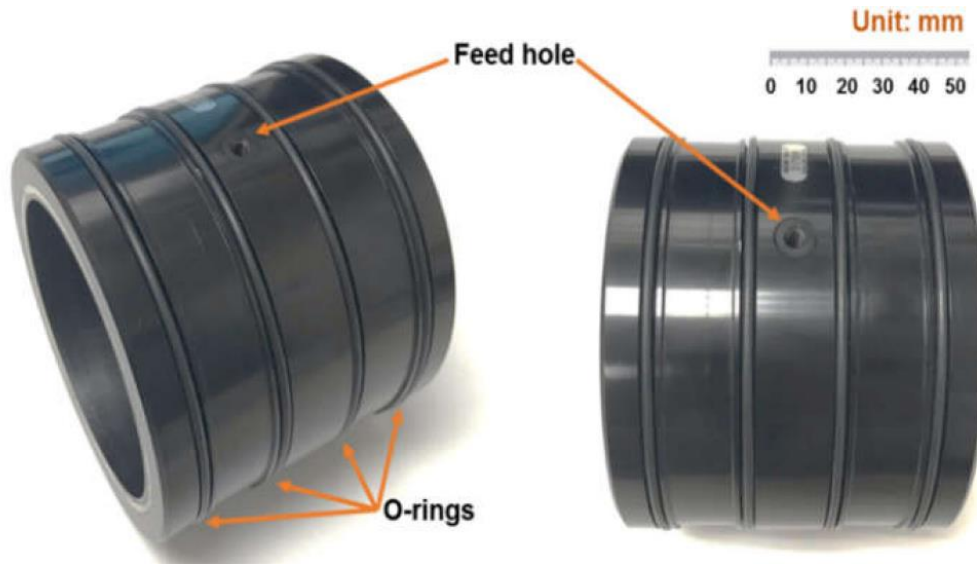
Photograph of a porous material cylindrical journal bearing (PGB) [5].
